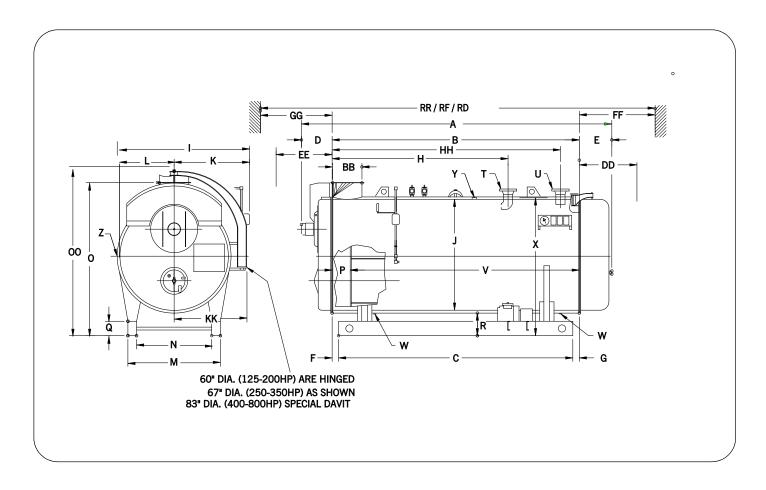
Model CBR Hot Water Boiler Dimensions - Sheet 1 of 2
